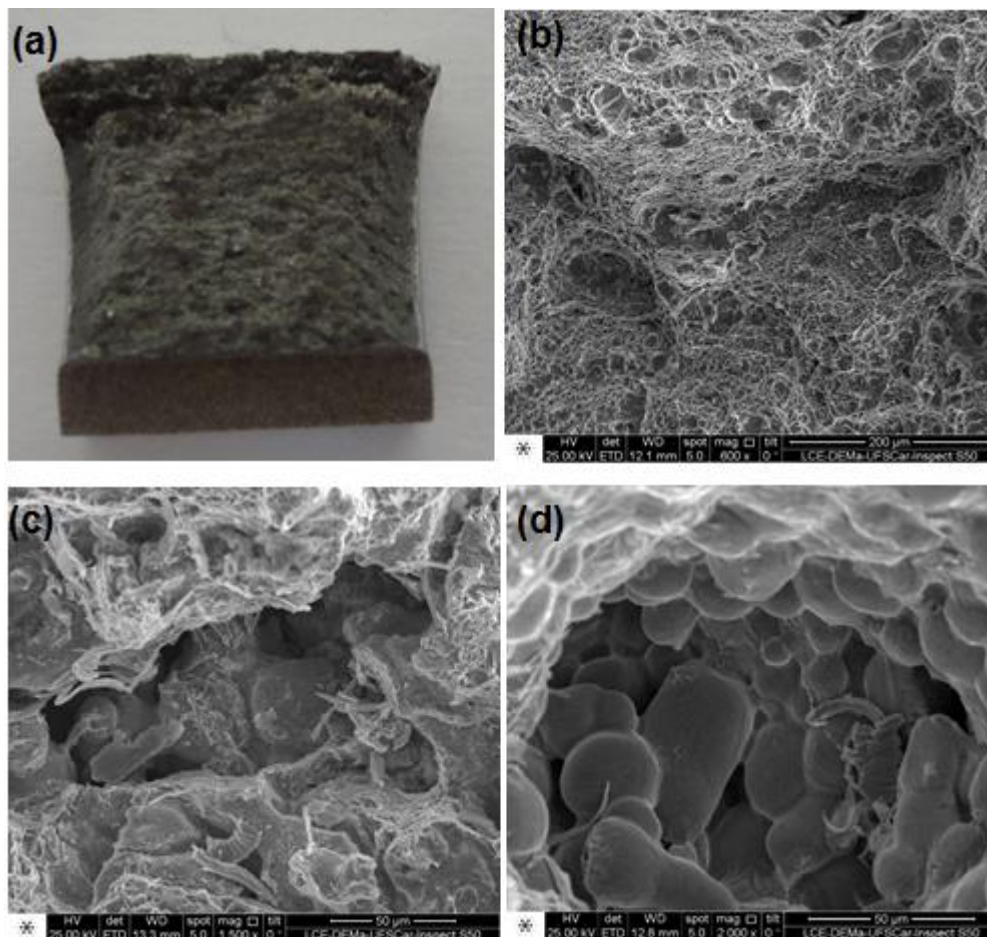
(a) Photography of the Charpy-V fracture surface and (b) dimpled fracture surface of the spray-formed SMSS after tempering at 650 °C/2h. (c) and (d) Shrinkage solidification pores.
